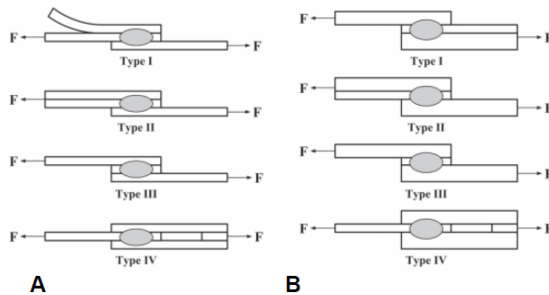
joint designs of the three sheet aa6061t6 welds: a — 1.0/1.0/1.0 mm stack; b — 1.5/1.0/2.0 mm stack.
